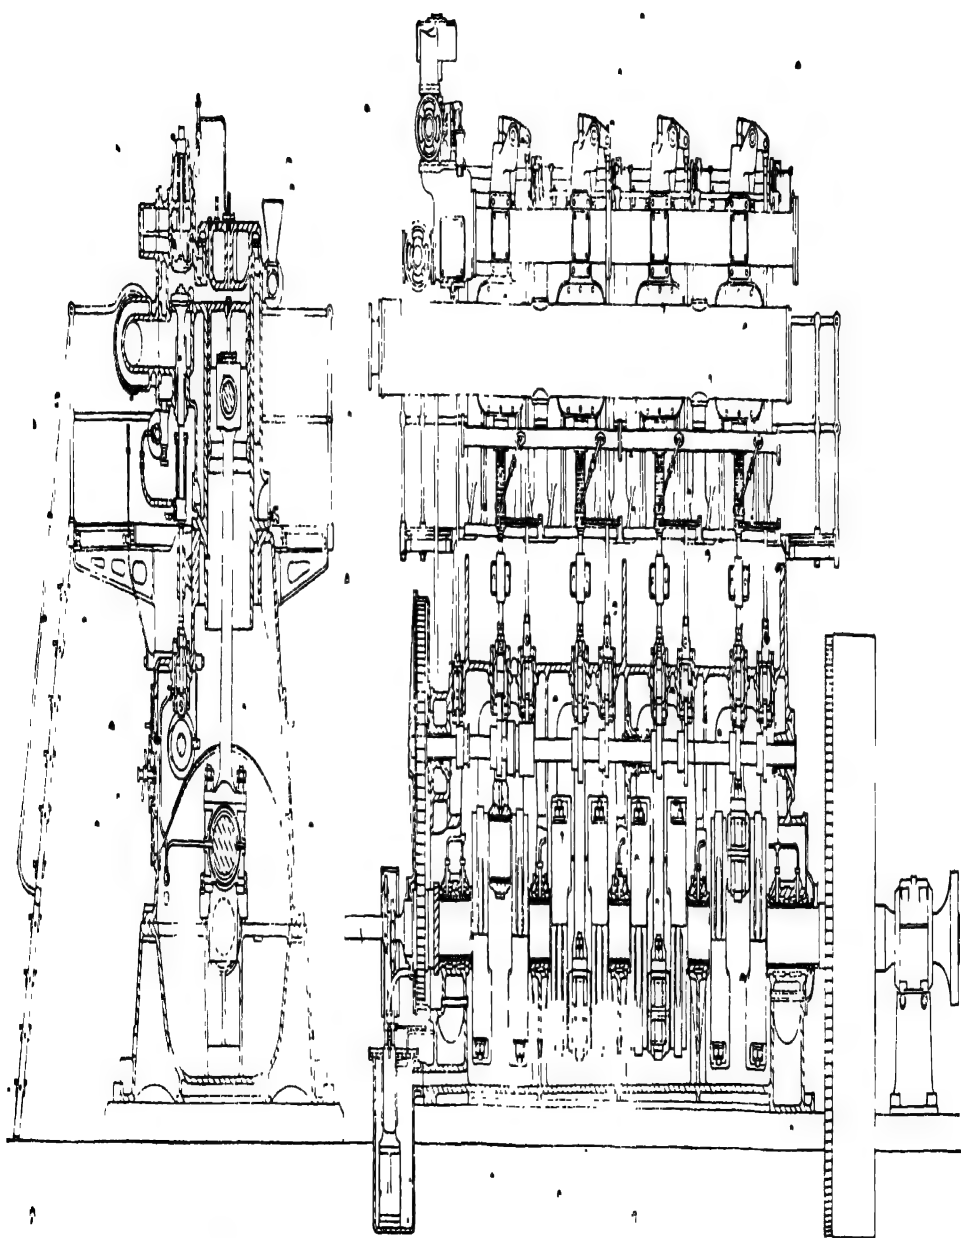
Sectional Arrangement of Four-cylinder Vertical Campbell Gas-engine. 350 B.H.P., 17 in. diameter, and 26 in. stroke
